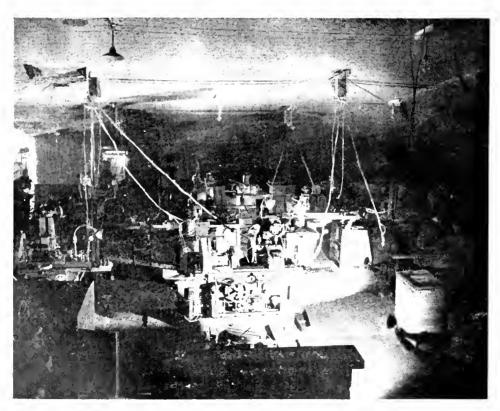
Jig and tool shop, Benten plant at Ova Works.
